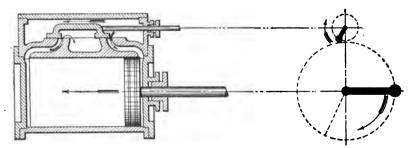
Position of Valve and Cylinder for Crank-End Admission
